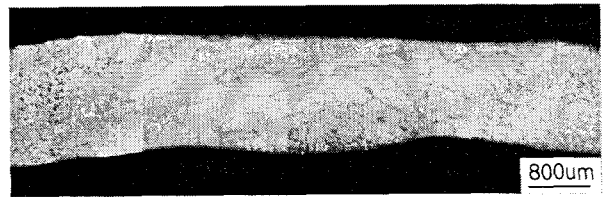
Macrostructure of the GTA welded STS409LW pipe (Grain size : 240µm)
